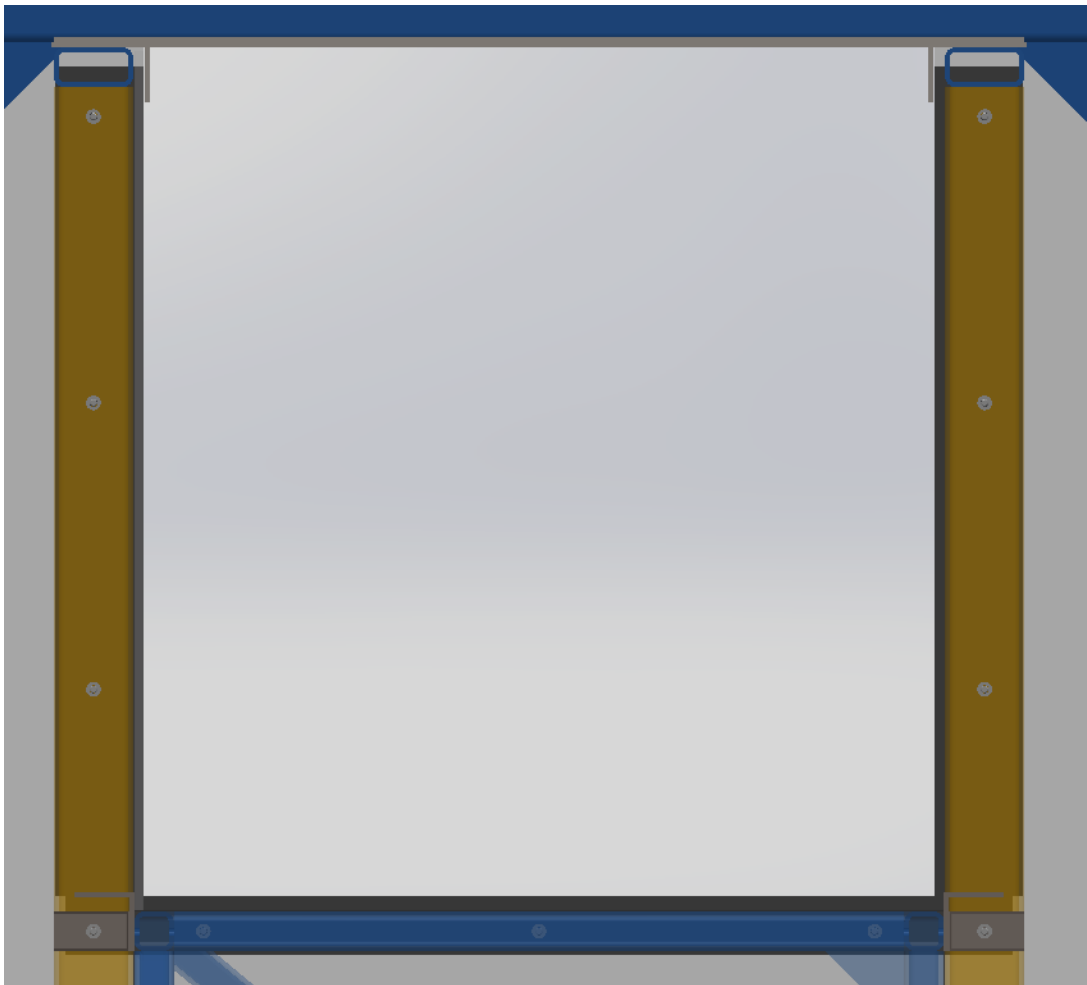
Angle beam to chassis module bolt connection.
